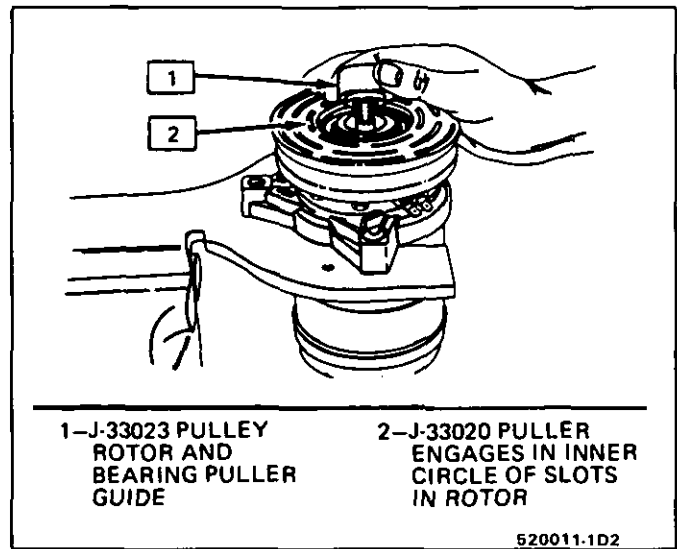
Installing Pulley Rotor/Bearing Puller Guide
